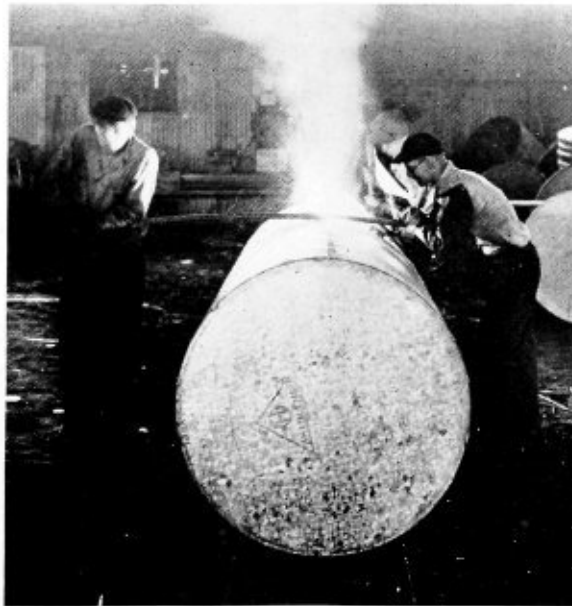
Tack welding longitudinal seams, the steel bar being used to press edges flush
